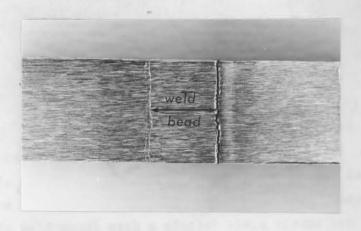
Top view of a hot rolled 3CR12 bent specimen welded with E3CR12. The brittle fracture which occurred in the HT HAZ is clearly evident together with the local plastic deformation in this zone on the left hand side of the weld bead.
